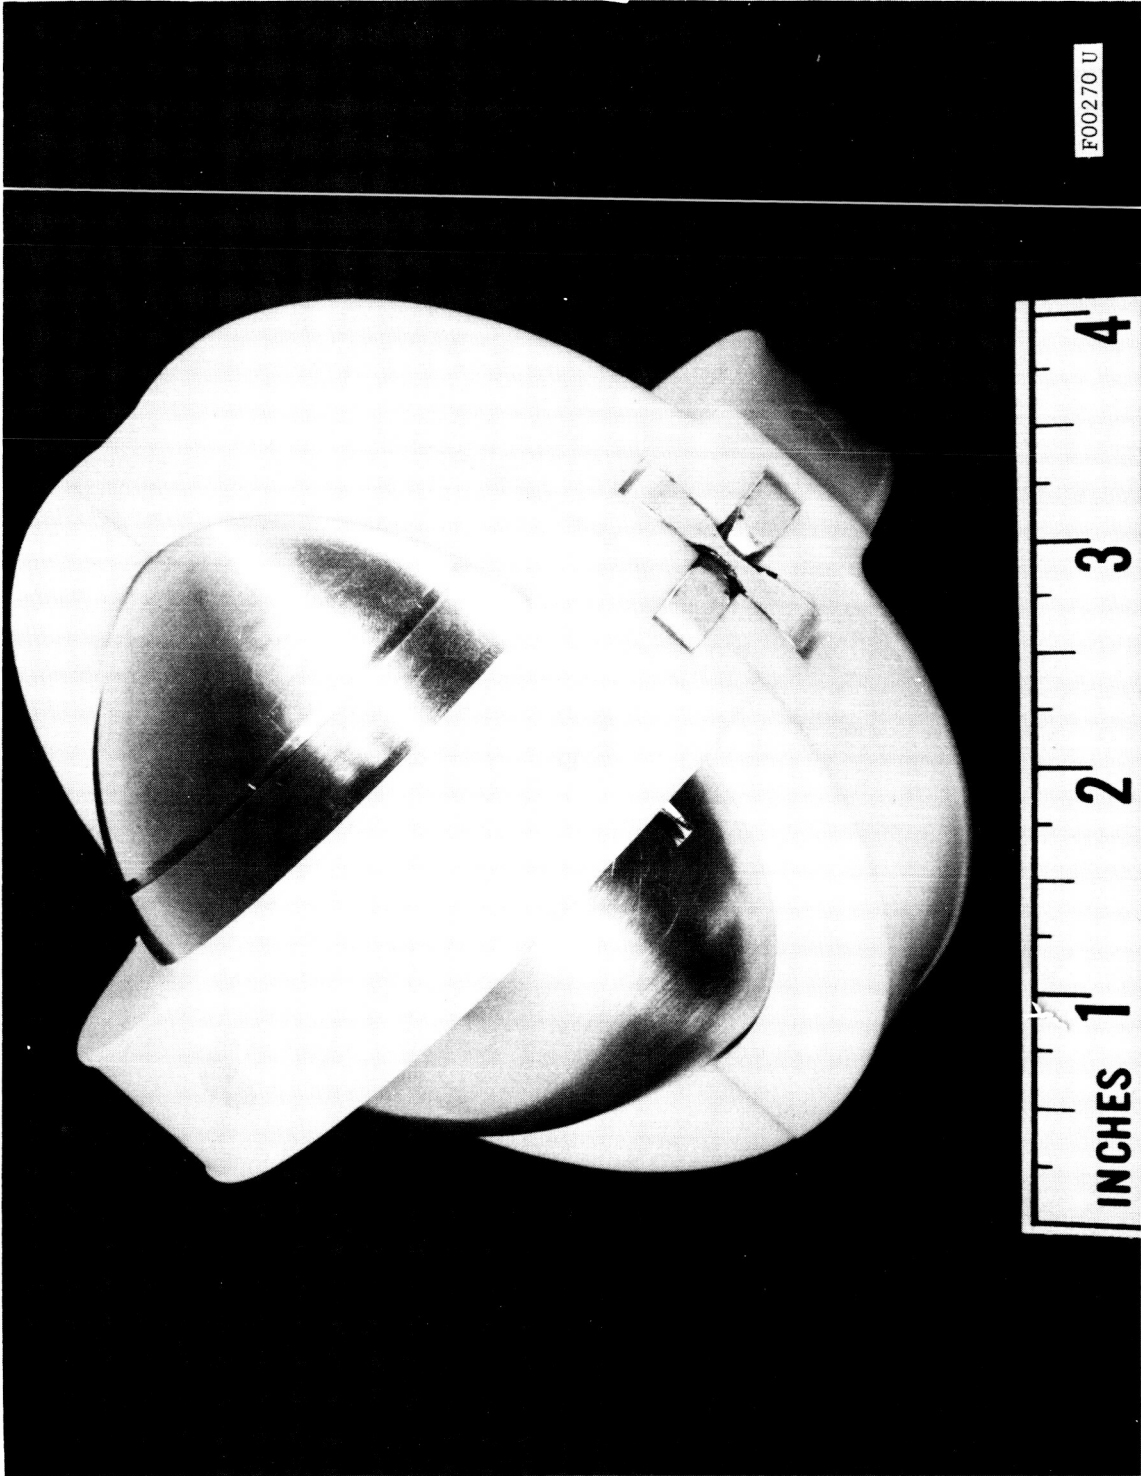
PENETROMETER STRUCTURAL ASSEMBLY
